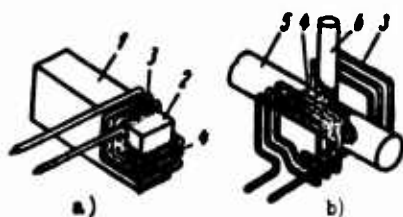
Diagram of high-frequency soldering: a) soldering of hard-alloy tool; b) soldering of tee: 1 - commercial cutter; 2 - hard alloy plate; 3 - inductor; 4 - zone of heating of metal; 5 and 6) combinable pipes.
